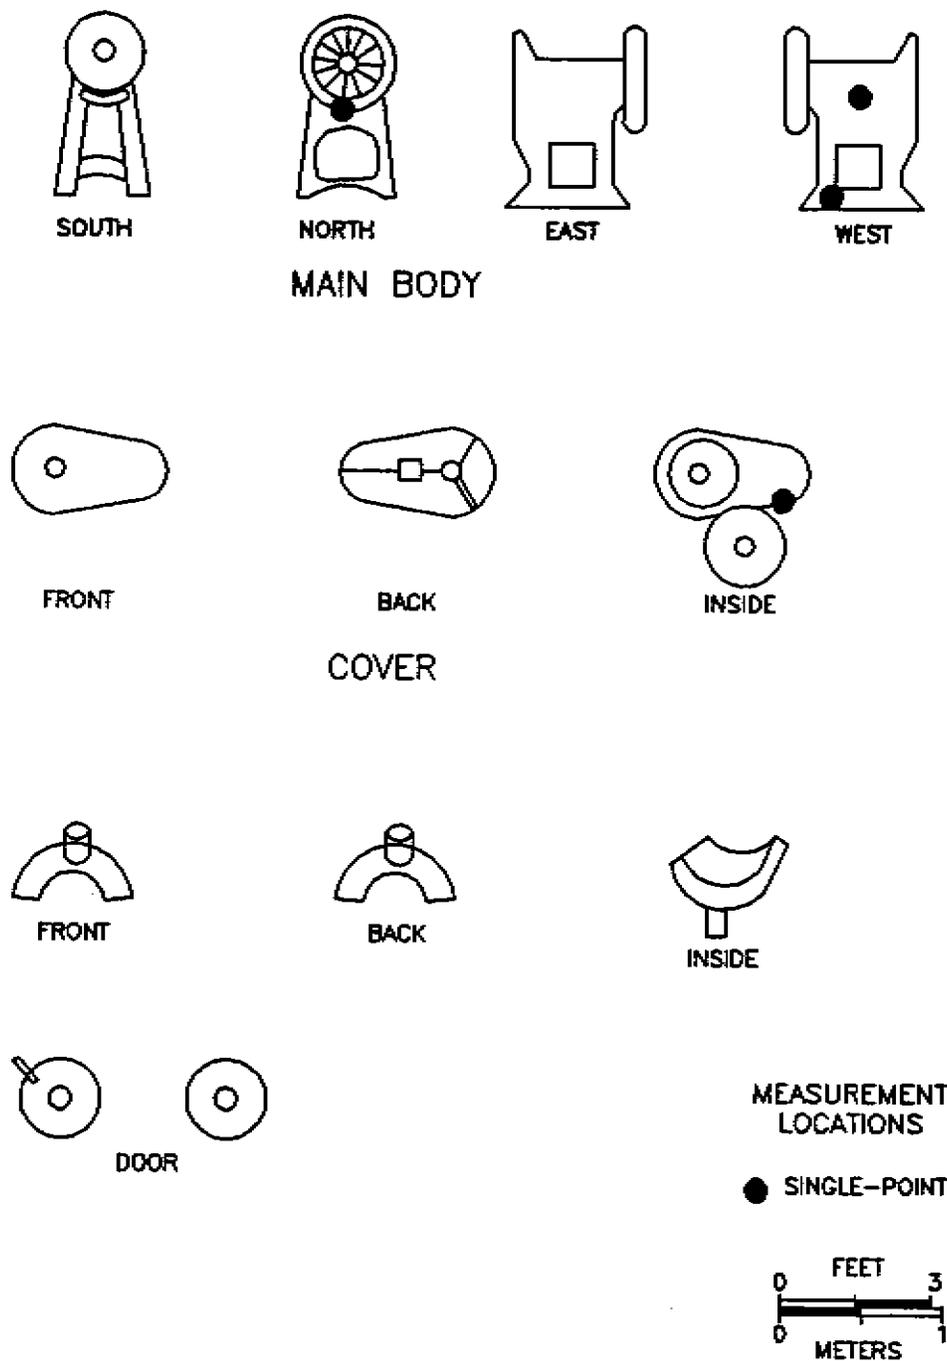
Building 30, Fabrication Room, Extruder #38348, Indicating Measurement Locations
